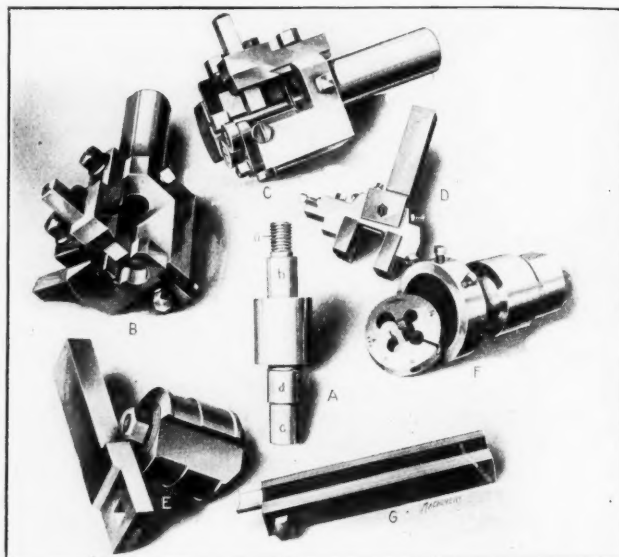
Representative Group of Tools used on the "Acme" Multiple-spindle Screw Machine for producing a Shouldered Stud
